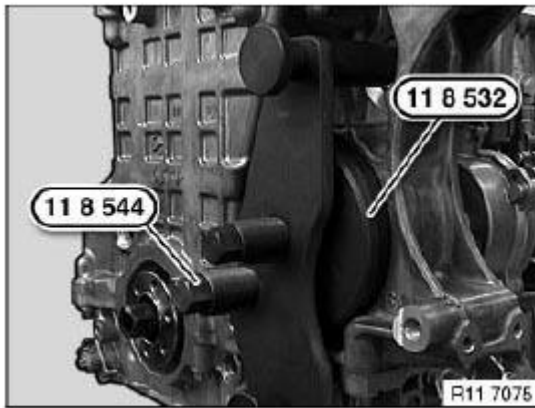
Positioning Special Tool (11 8 532) On Sealing Cover
